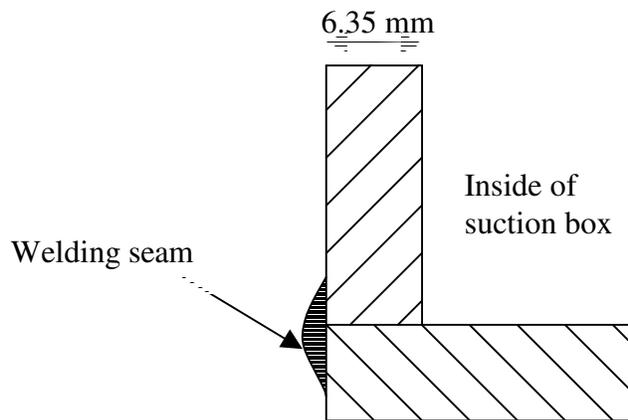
Cross-section of the Suction Box Welding Arrangement
